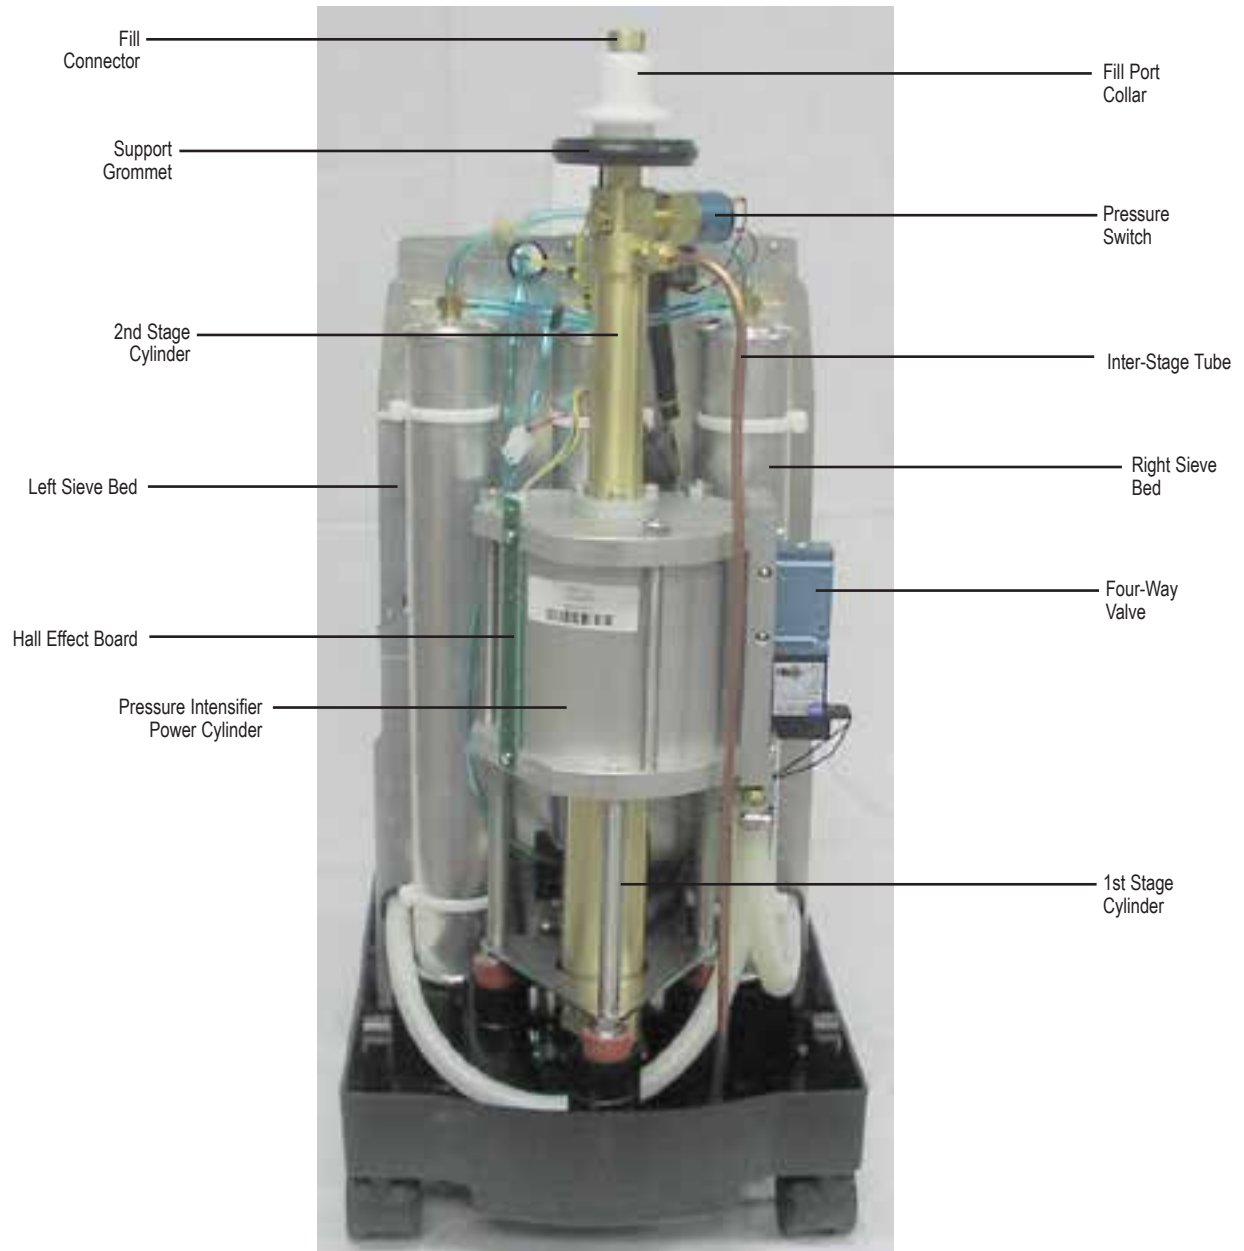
INTERIOR, RIGHT SIDE VIEW
